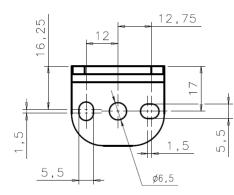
Rotating mounting bracket BAM MB-LG-023-B13-3
